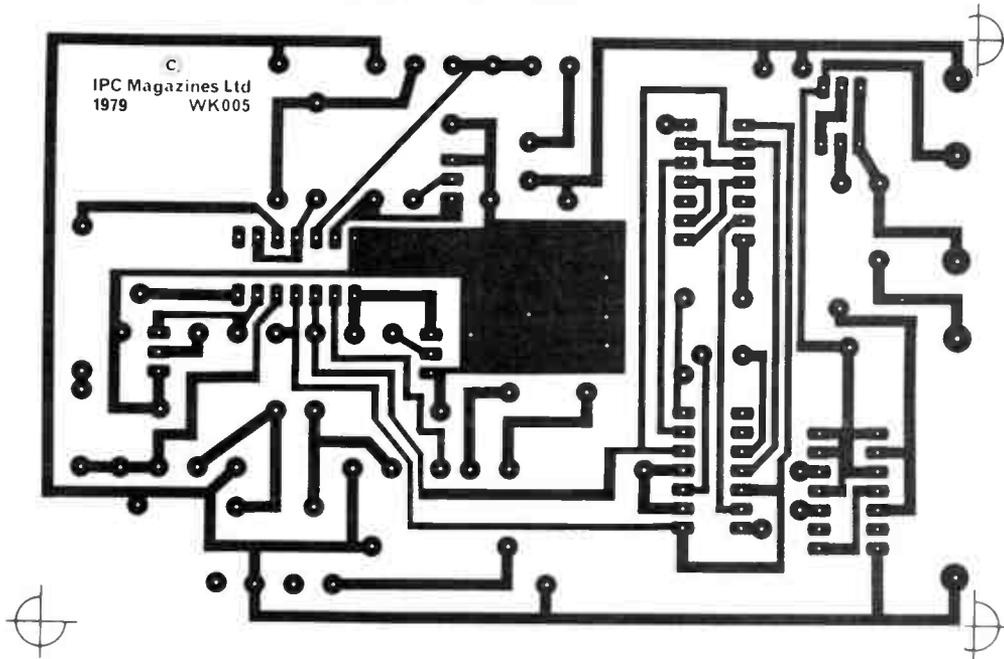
The copper track pattern and component placement drawing for Board 2 shown full size.
